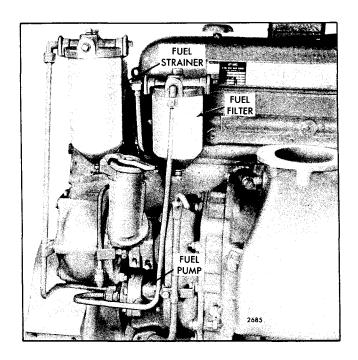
Fuel Pump, Fuel Strainer and Fuel Filter Mounting
